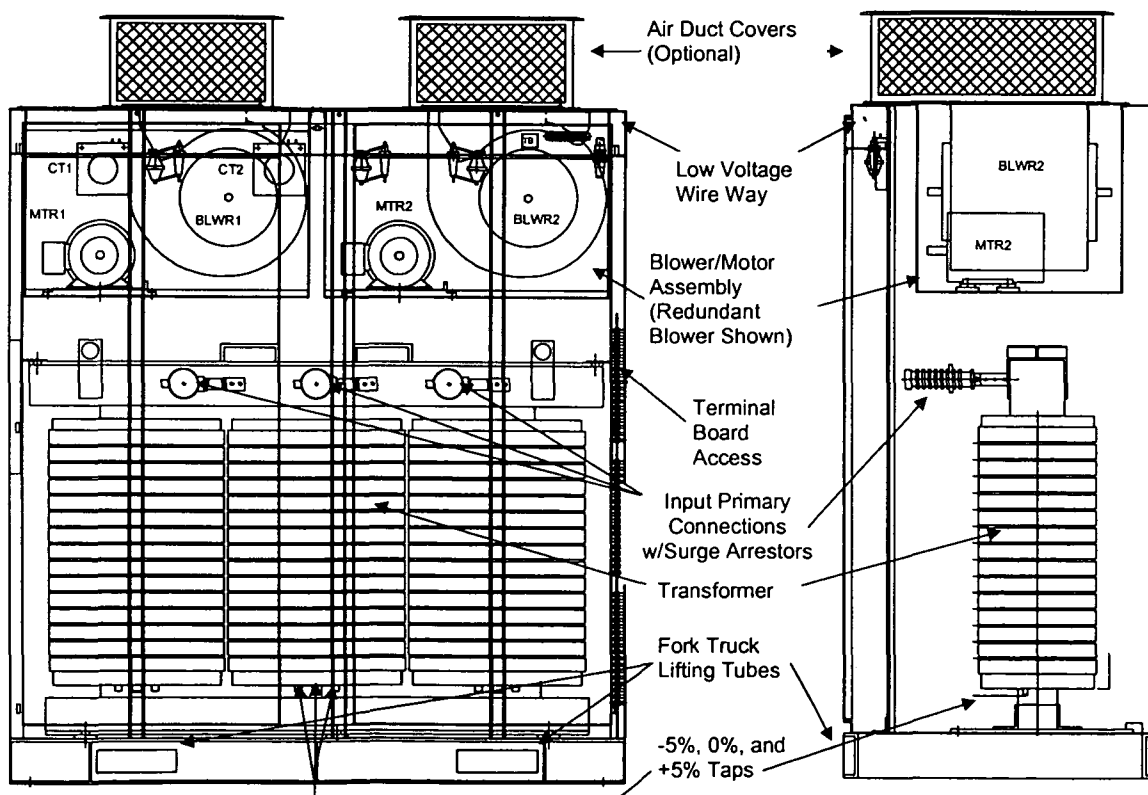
Inside View of Typical Transformer/Blower Cabinet (Sectional Type)
